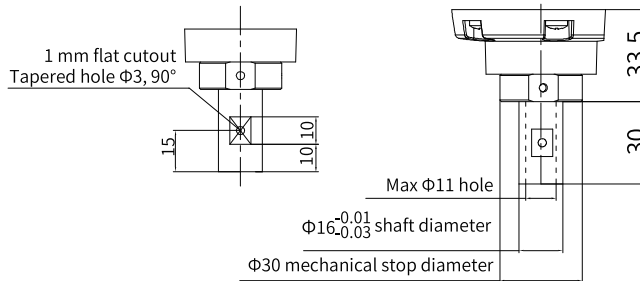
Auxiliary tooling installation dimensions for IR-TS4-35Z15S-INT (unit: mm)
